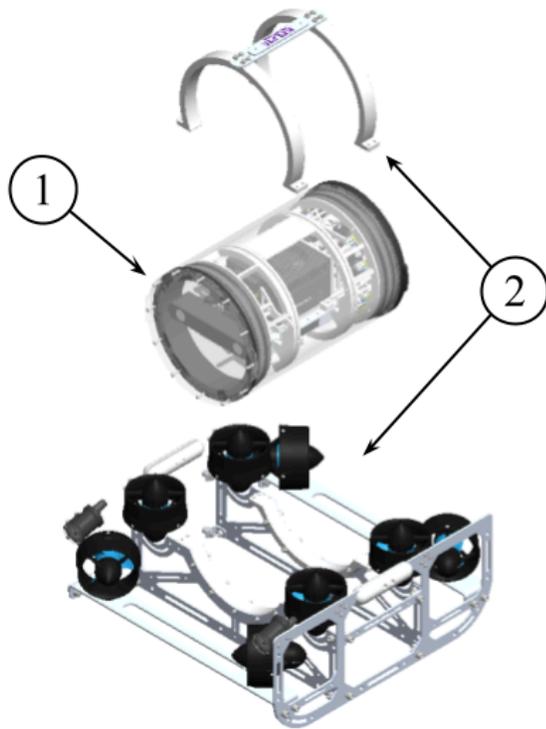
Kelpie CAD exploded view showing the hull (1) and the frame (2).
